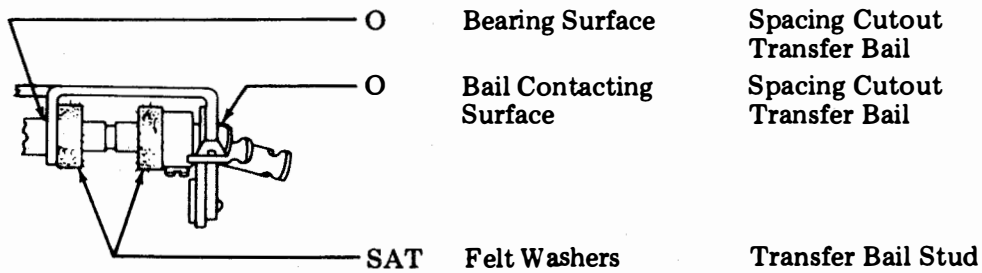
Spacing Cutout Transfer Bail, Front View
